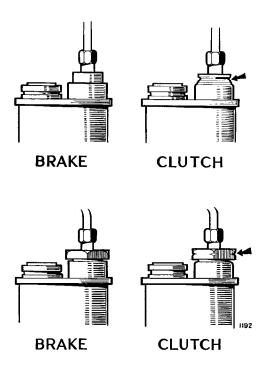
A clutch master cylinder can be distinguished from a brake master cylinder by the groove around the end cap.
